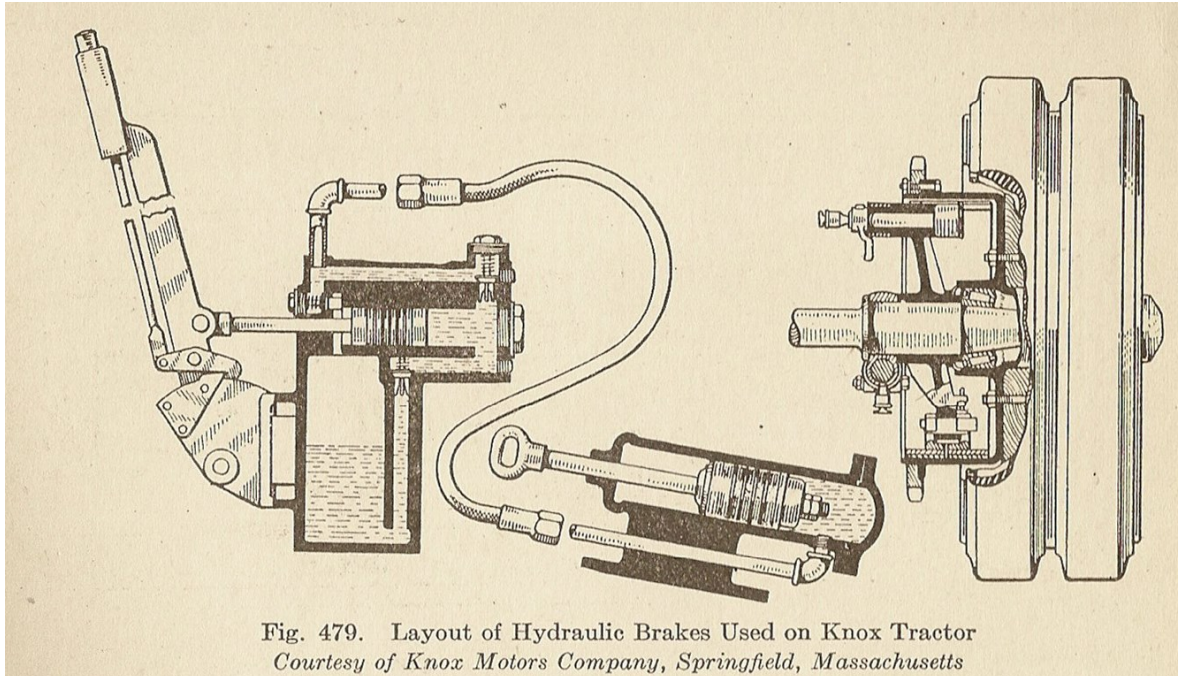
Layout of Hydraulic Brakes Used on Knox Tractor
